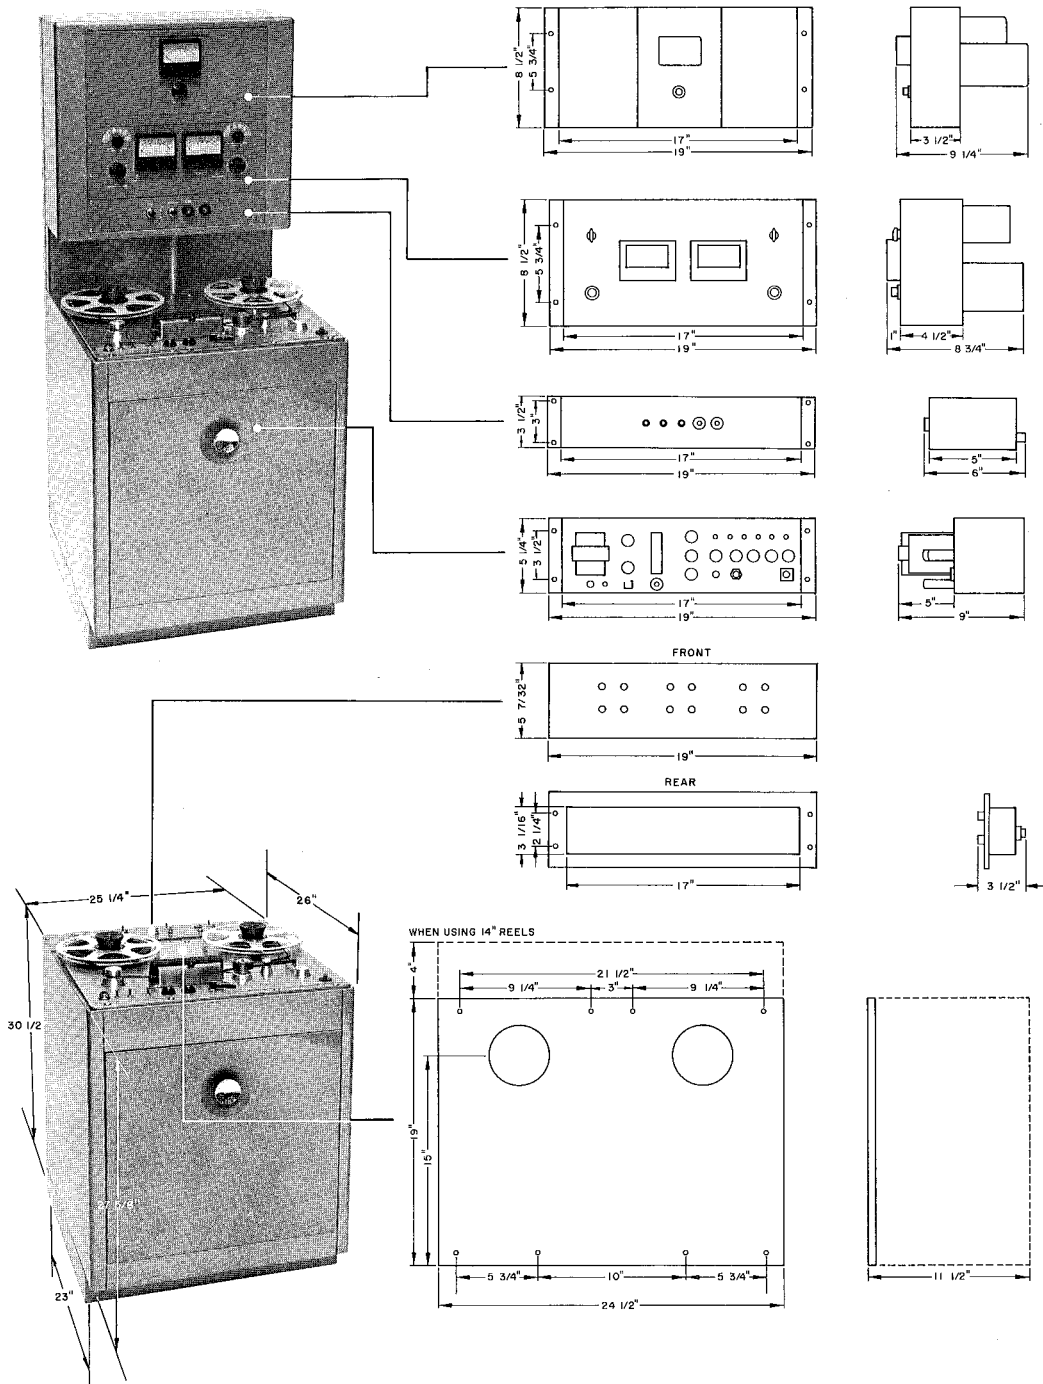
SYSTEM COMPONENTS AND DIMENSIONS
